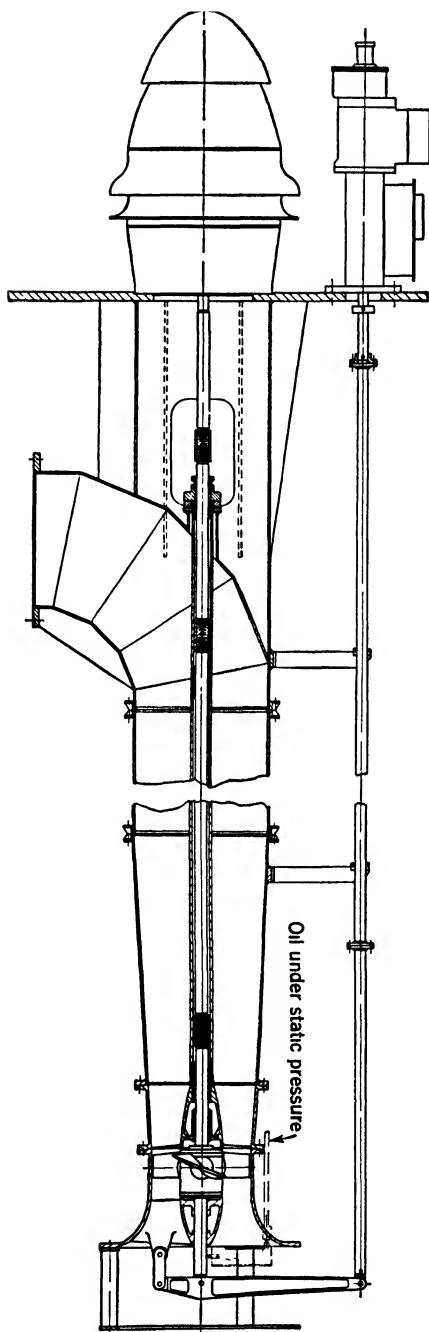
Twenty-four-inch Ingersoll-Rand adjustable impeller vane axial flow pump at Central Illinois Electric and Gas Company; 22,000 g.p.m., 24 8 ft. head, 880 r.p.m.
